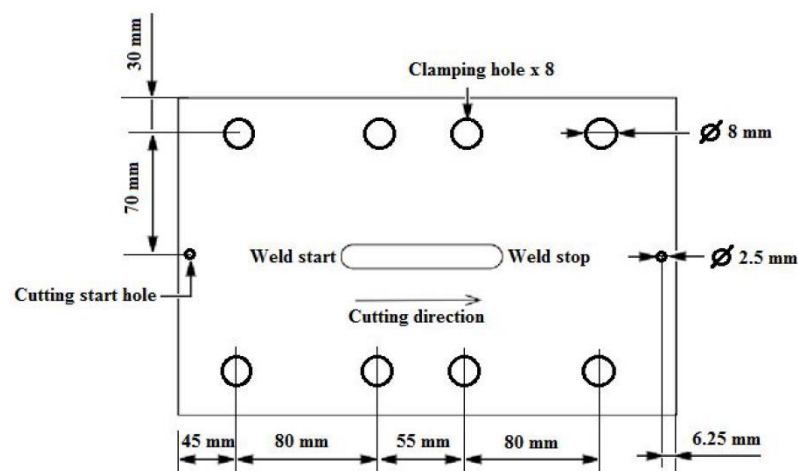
20: Schematic of the 3-pass specimen showing the cutting holes and clamping holes [101].
